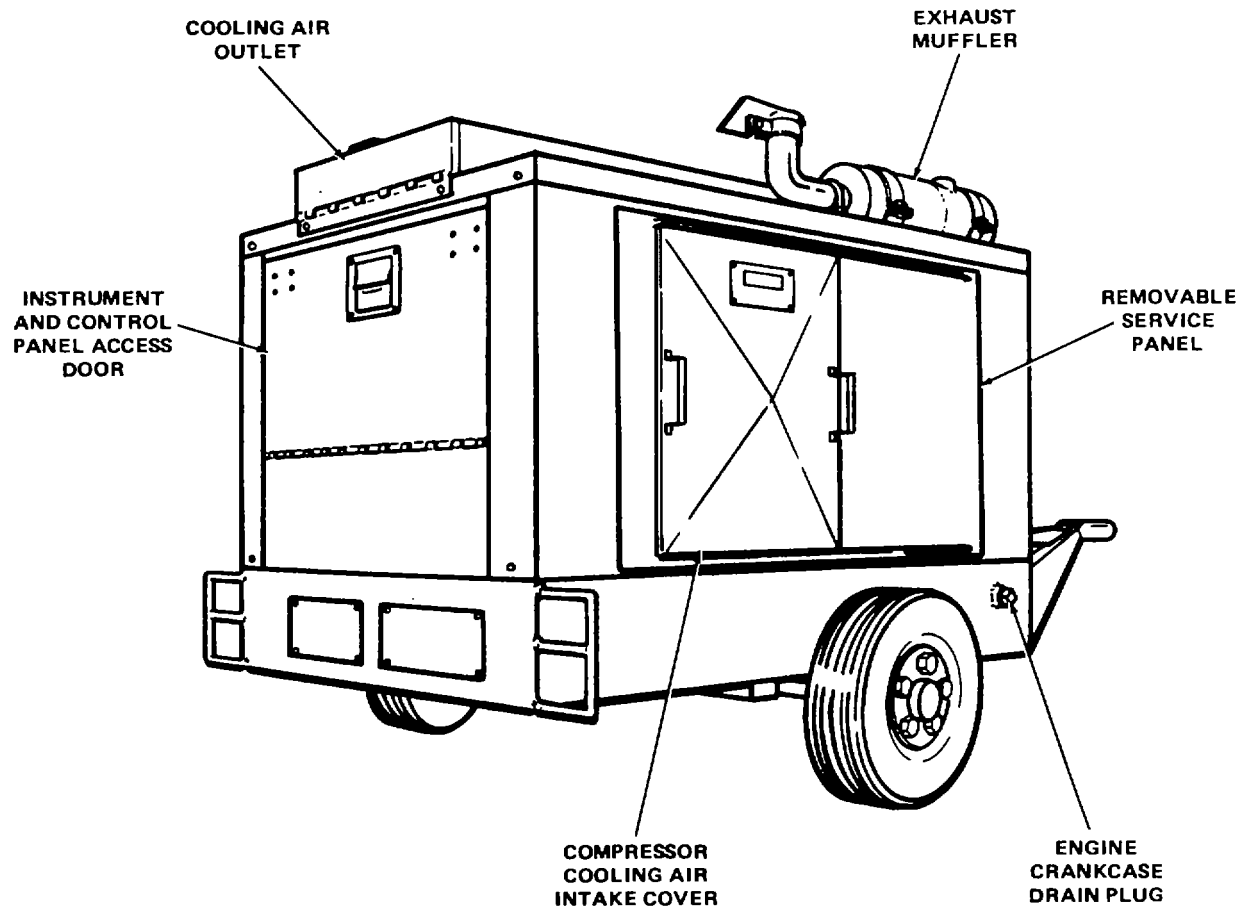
Air Compressor Model KA15-03-P, Right Rear, Three-Quarter View
